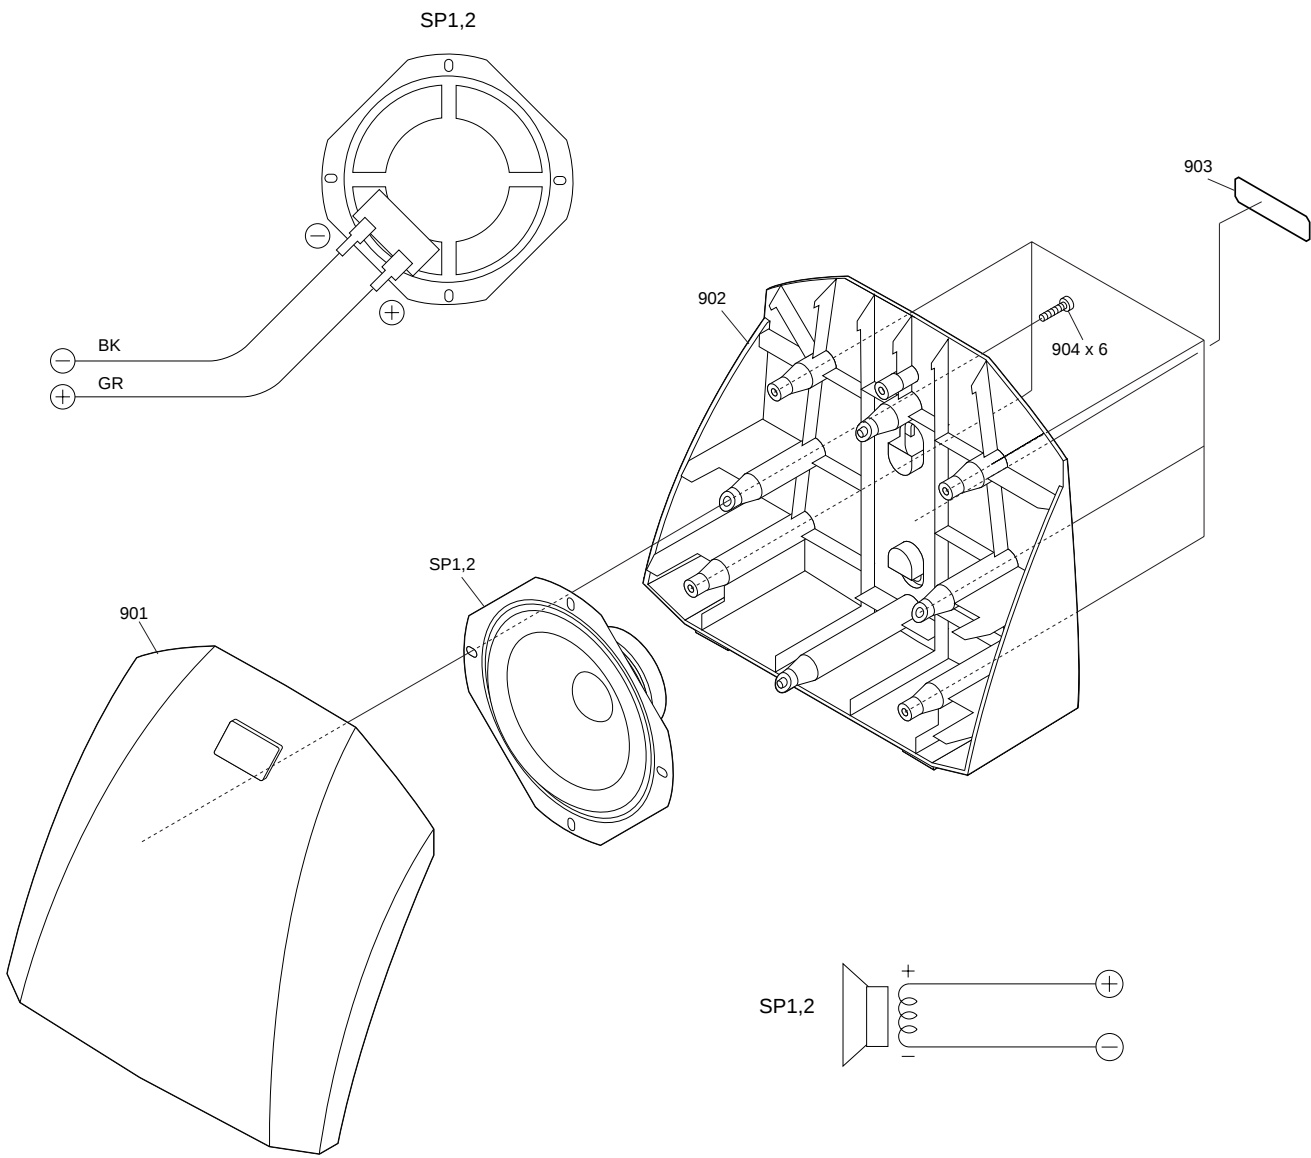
SPEAKER EXPLODED VIEW (2/2)
